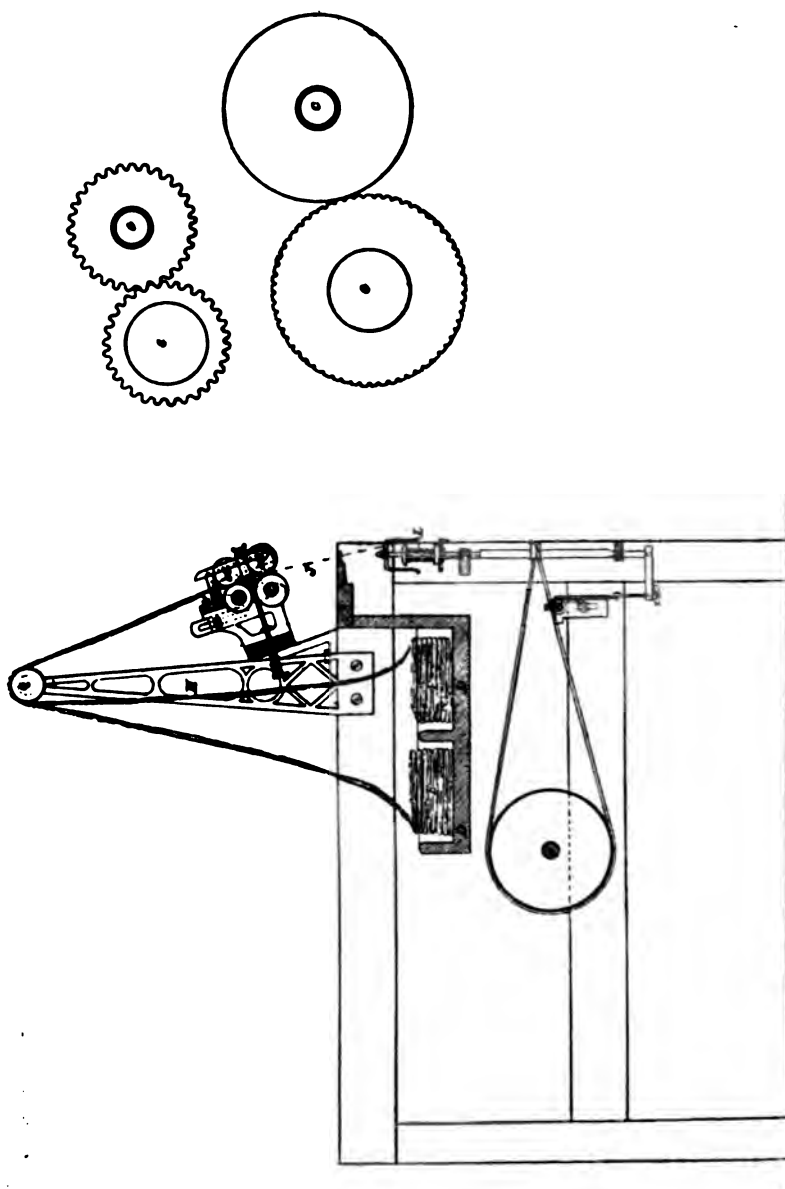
of Kay's specification (5226 of 1825) with enlarged elevation of drawing rollers, c , c , and retaining-rollers e , e .
